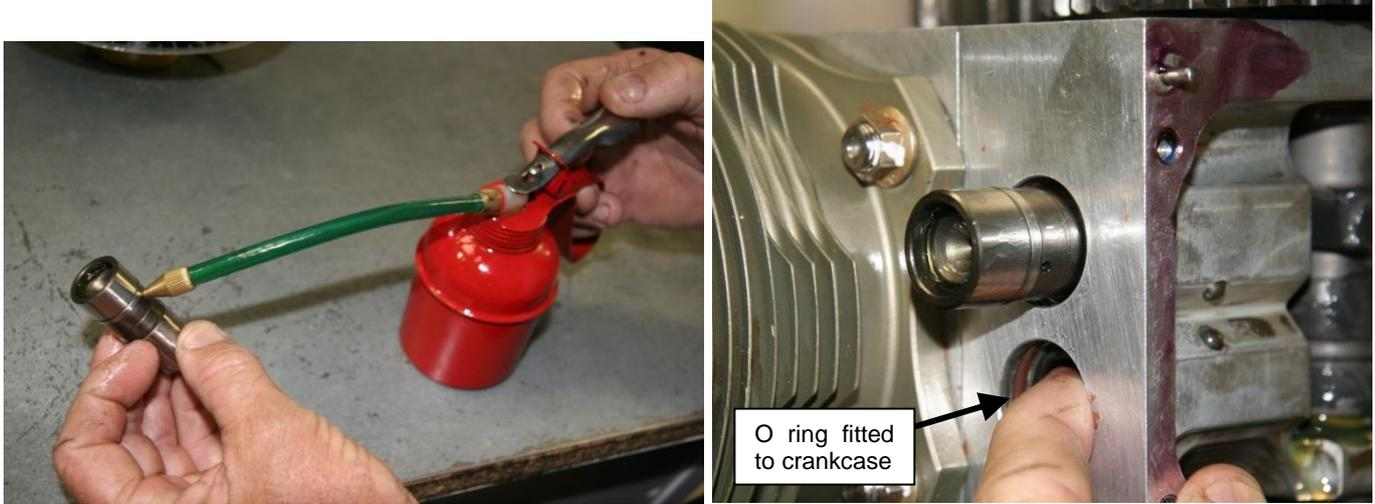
Fitting Hydraulic Lifter To Crankcase
